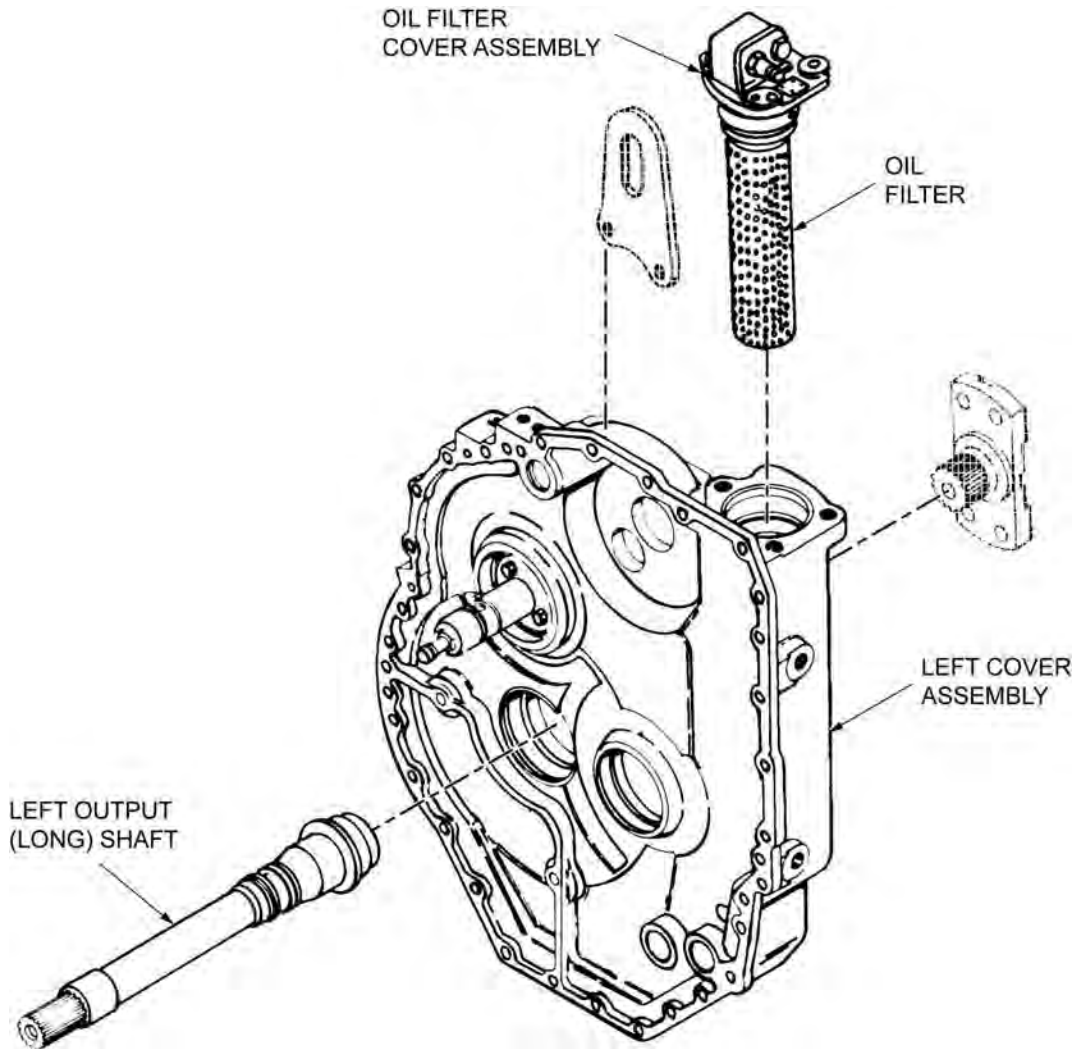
Exploded View of Major Components of Left Cover Assembly.
